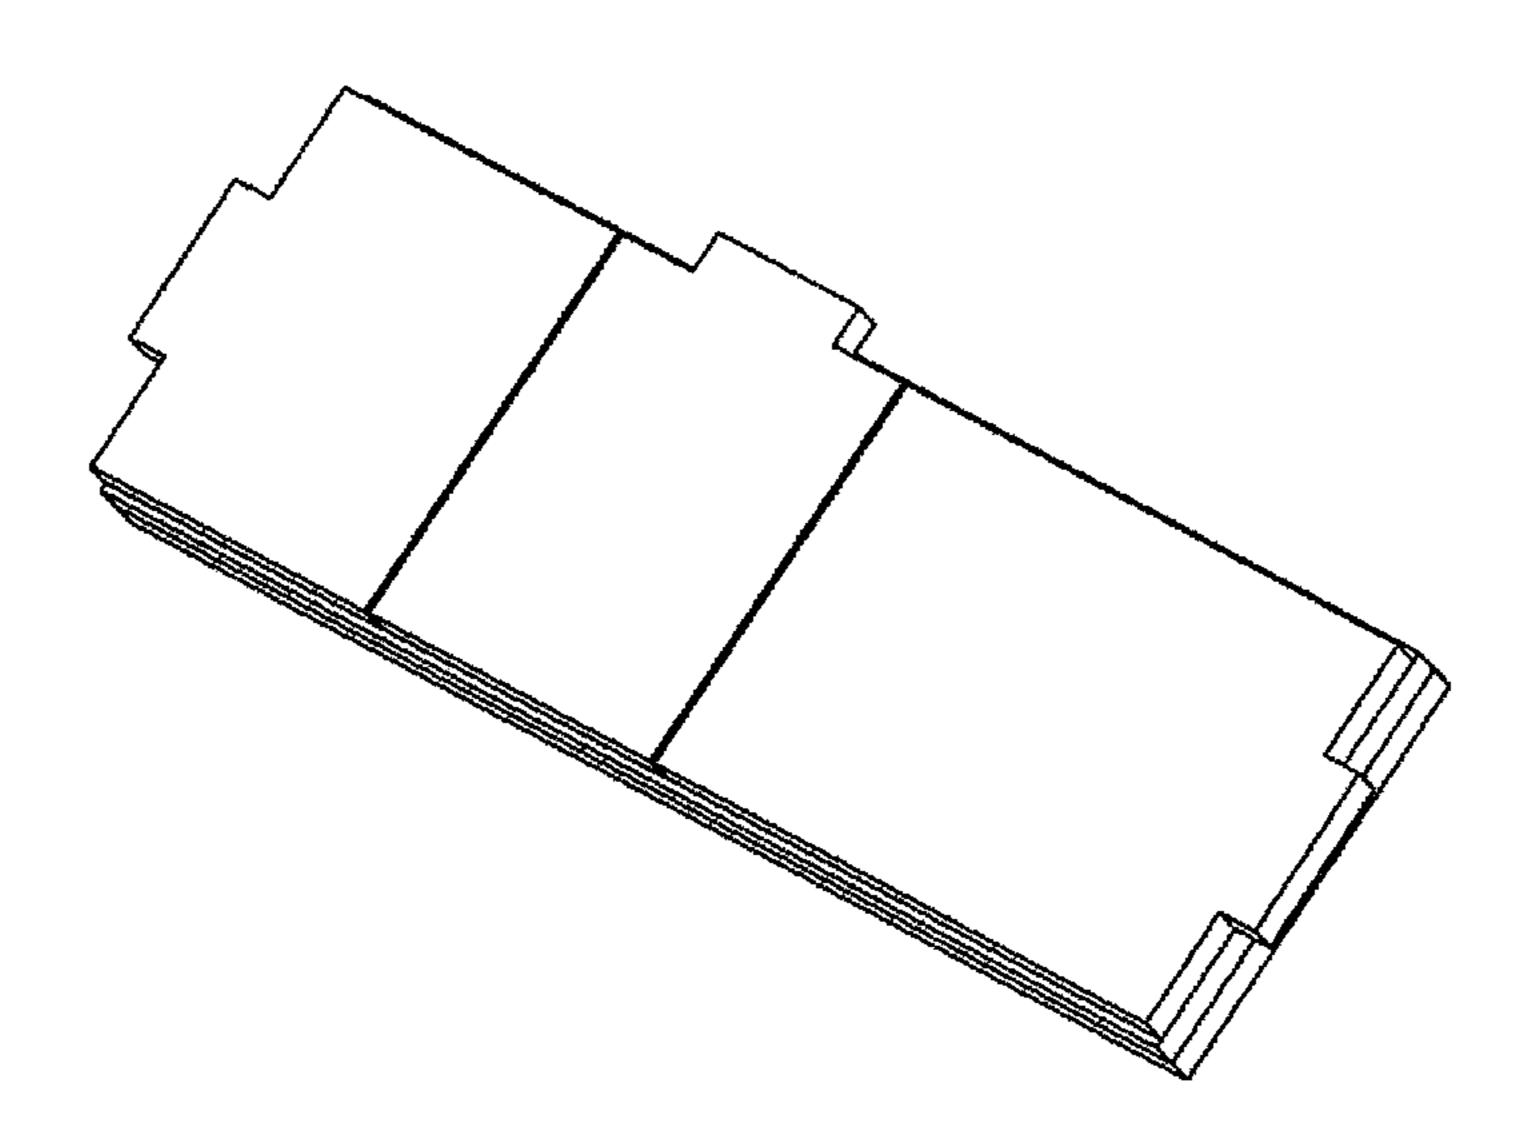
is a front elevational view of assembled explosive detection package of FIG. 8.
